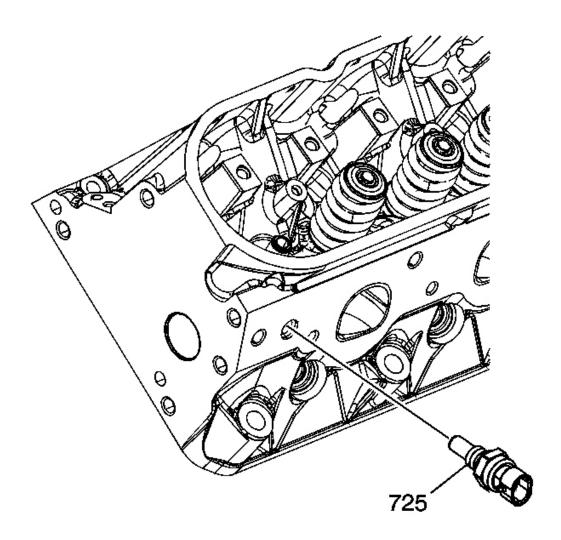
Coolant Sensor Courtesy of GENERAL MOTORS CORP.
